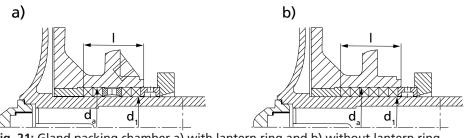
Gland packing chamber a) with lantern ring and b) without lantern ring
